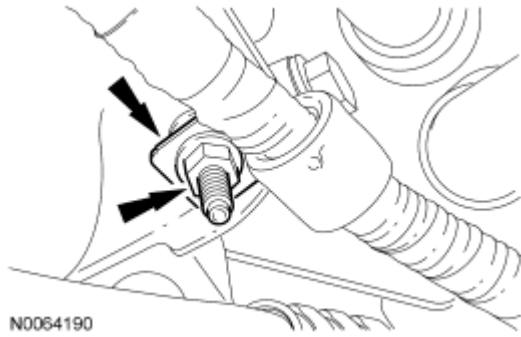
Removing Nut & Wire Harness Bracket From Oil Pan Stud Bolt
